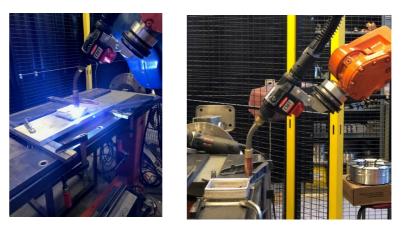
Wire Arc Additive Manufacturing of aluminium - making a "pet food bowl"
